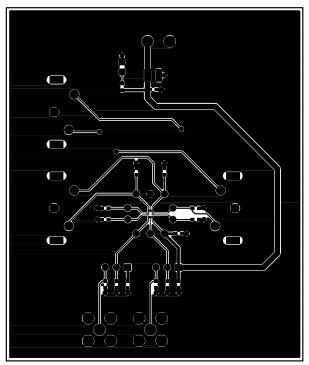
PCB Drawing Layer 1 (Top Layer of the Evaluation Board)
